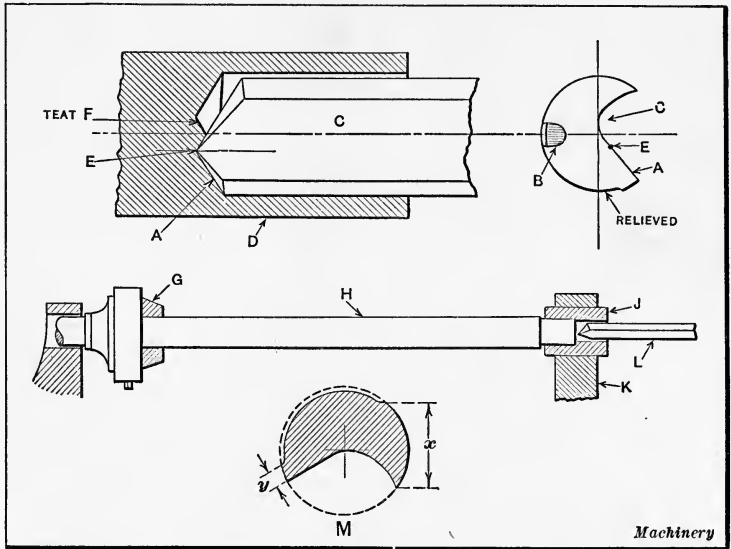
Type of Deep-hole Drill adapted to Drilling Rifle Barrels
